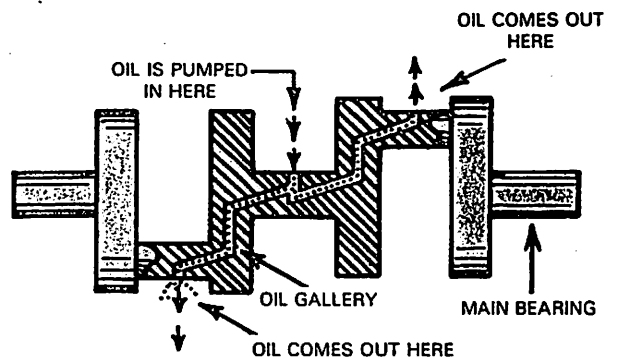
Crankshaft partially cut away shows how oil is pumped into center main bearing. From there it enters an oil gallery drilled through the crankshaft to each rod journal.
